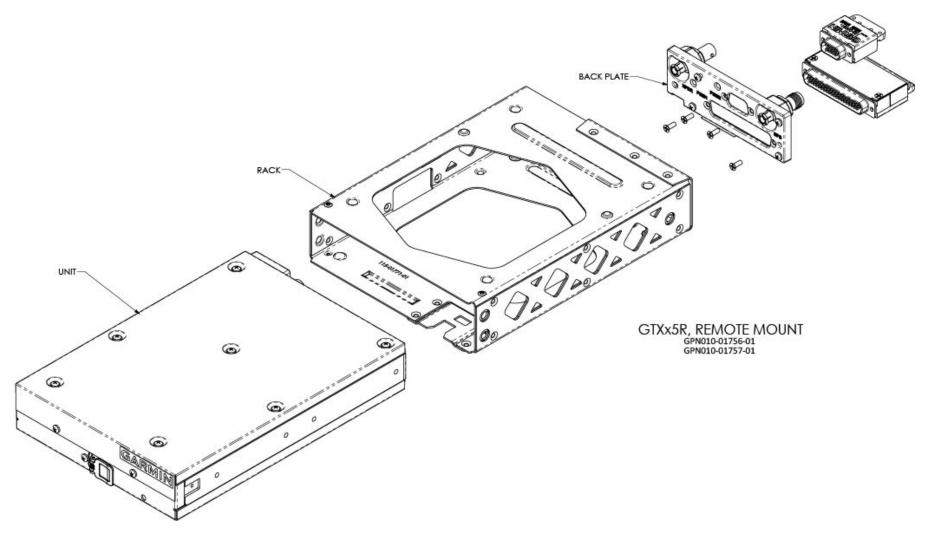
GTX 35R/45R Standard Remote Mount Assembly Shown
